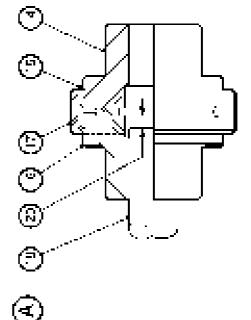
Exploded view of the pump-motor, coupling drive and coupling housing
